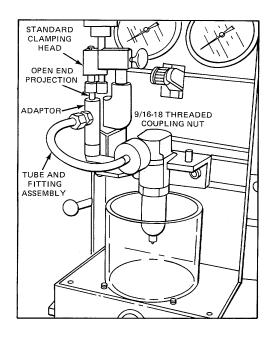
Adaptor and Tube Assembly on Injector Tester J23010
